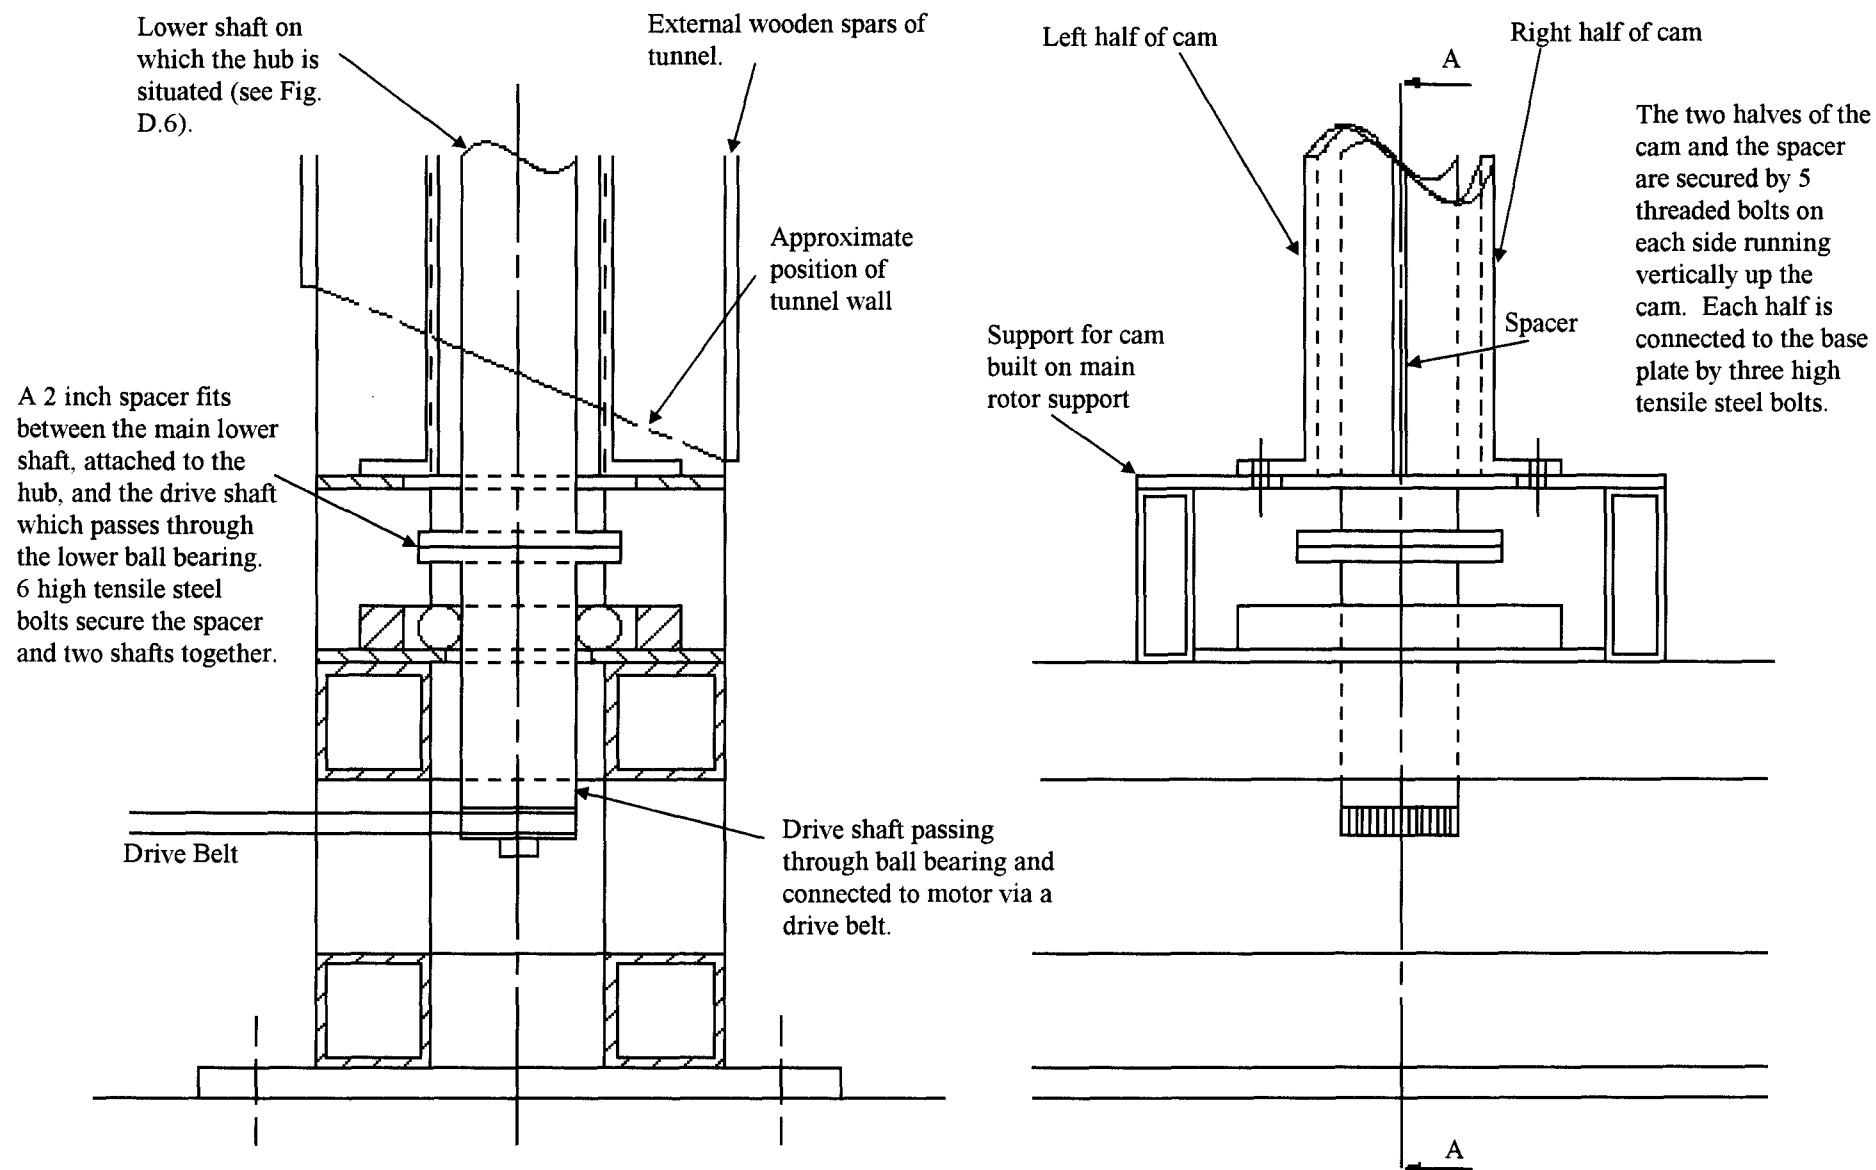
Technical Drawing of lower rotating assembly illustrating position of the cam for providing cyclic pitch.
